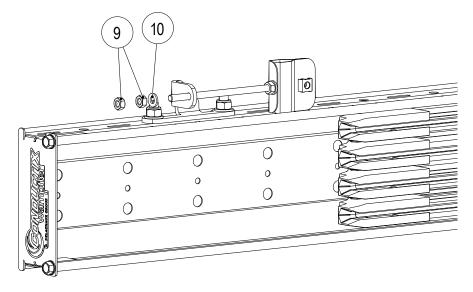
Counter threaded rod with screw connections (9 and 10)
